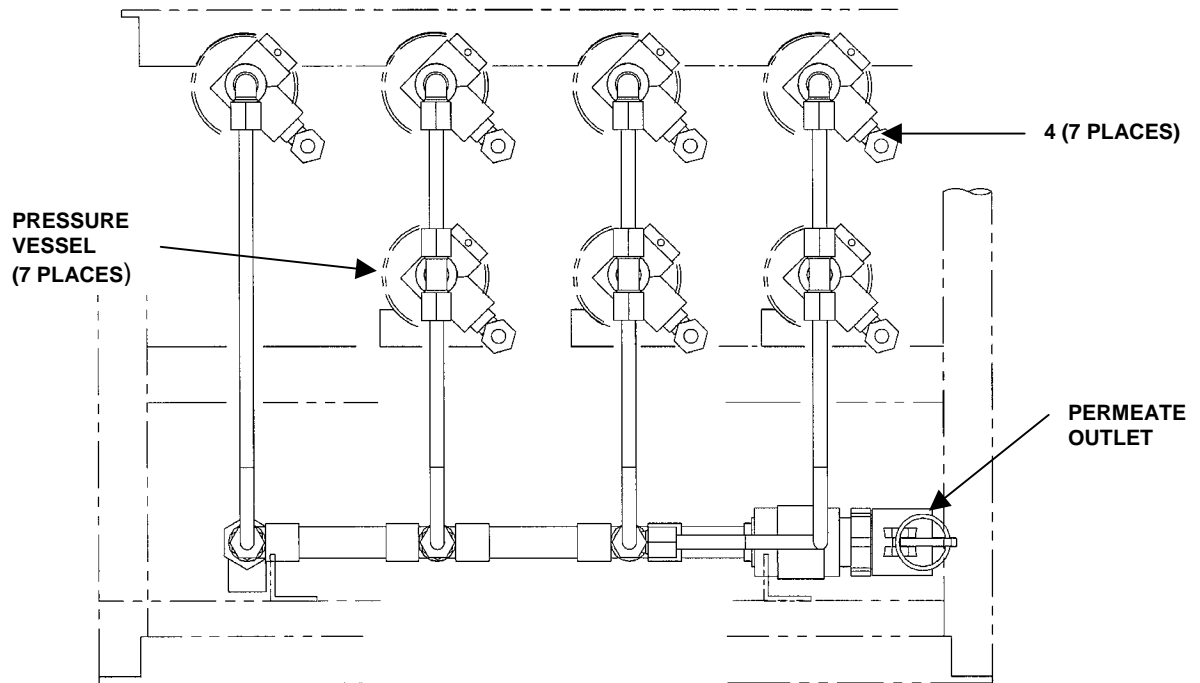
Sampling Ball Valves and Pressure Vessel Assemblies.
